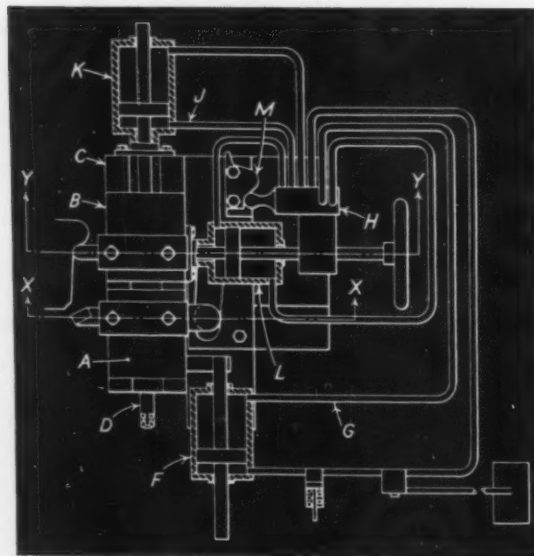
Plan view of a hydraulic copying system for a railroad car wheel lathe that permits turning tread and flange portions simultaneously.
